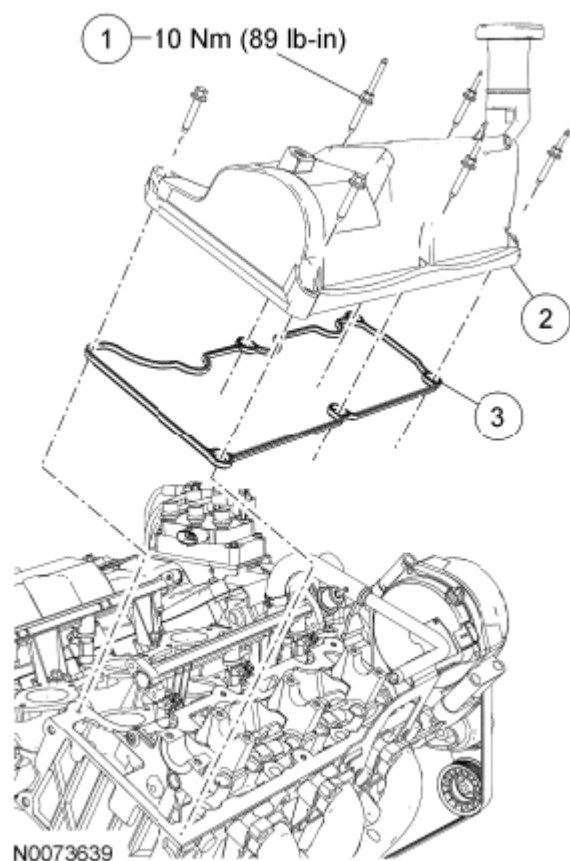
Identifying RH Valve Cover Components With Torque Specifications (2 Of 2)
